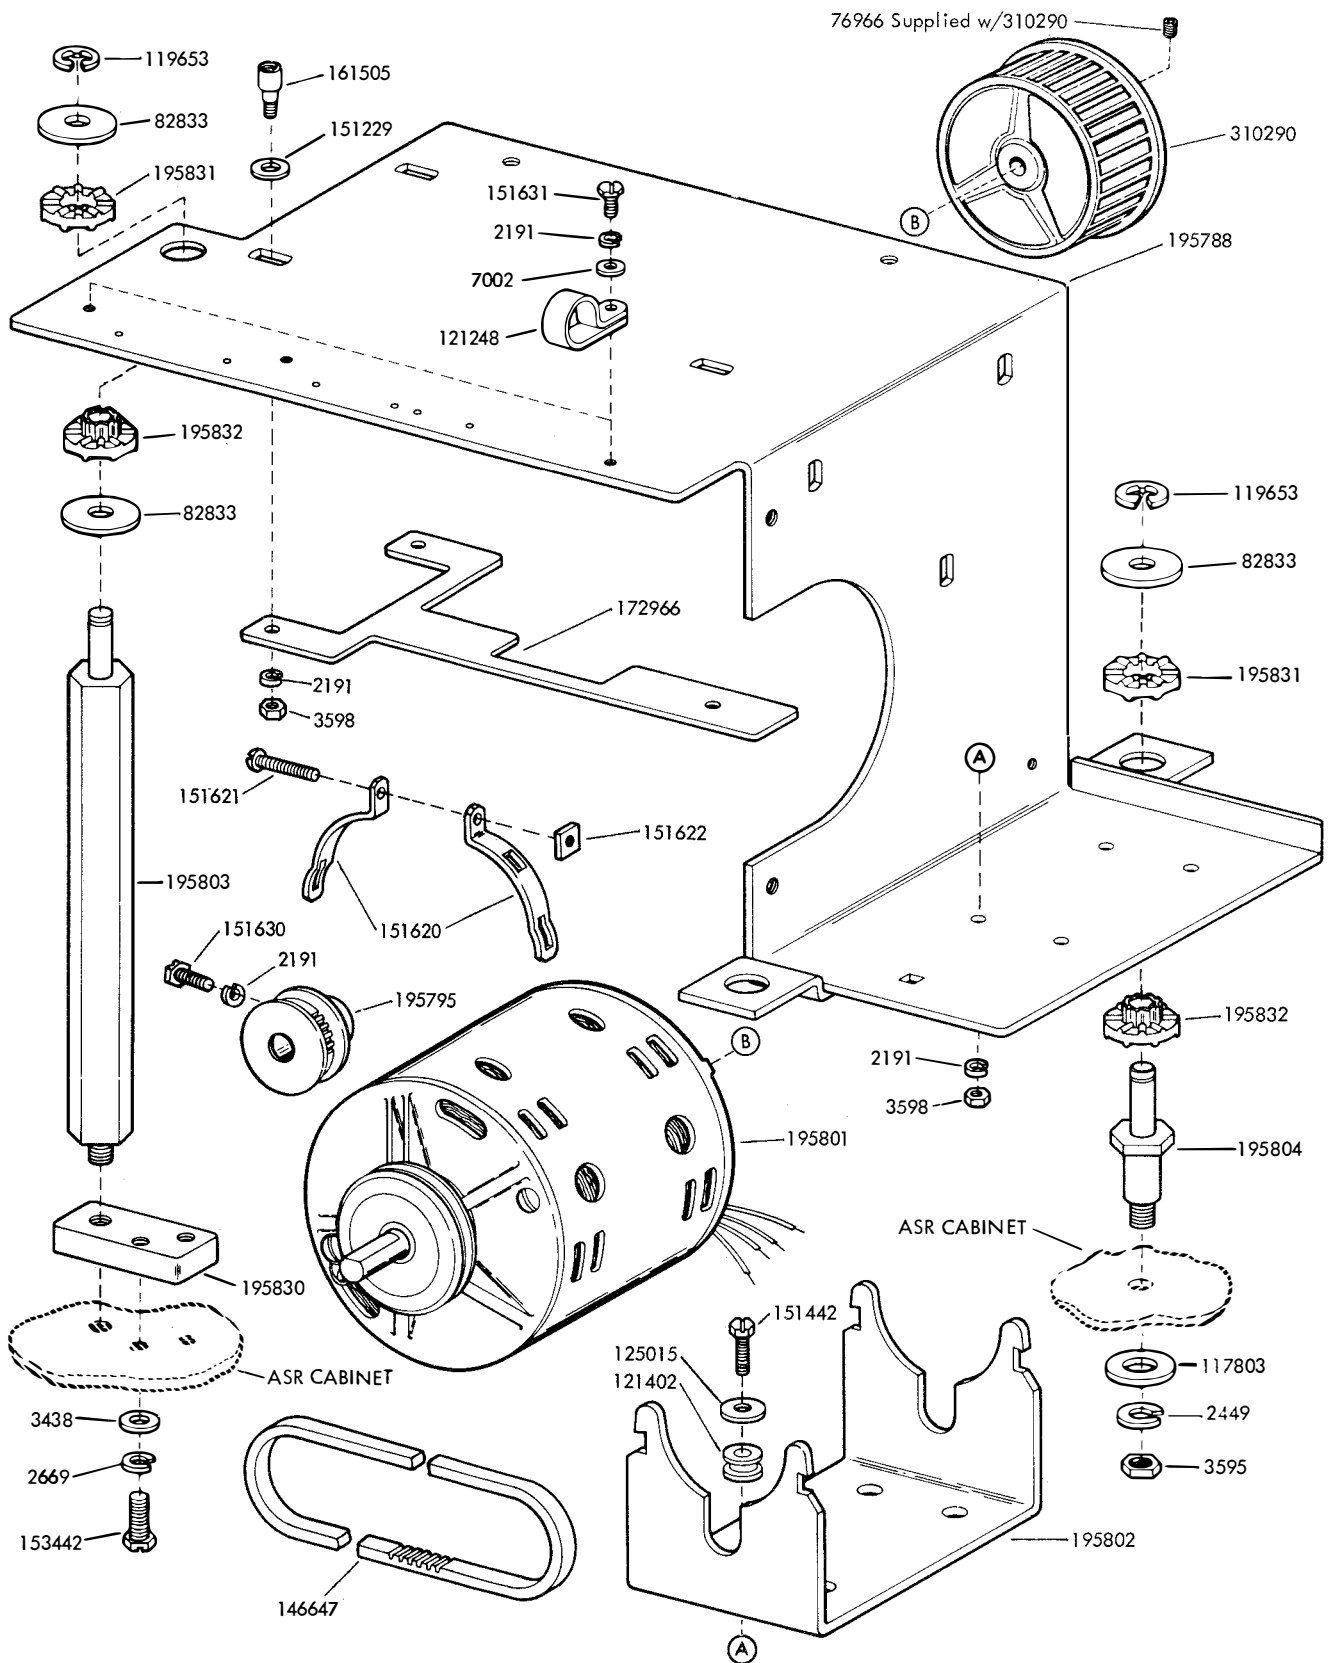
AUXILIARY TYPING REPERFORATOR BASE AND MOTOR
